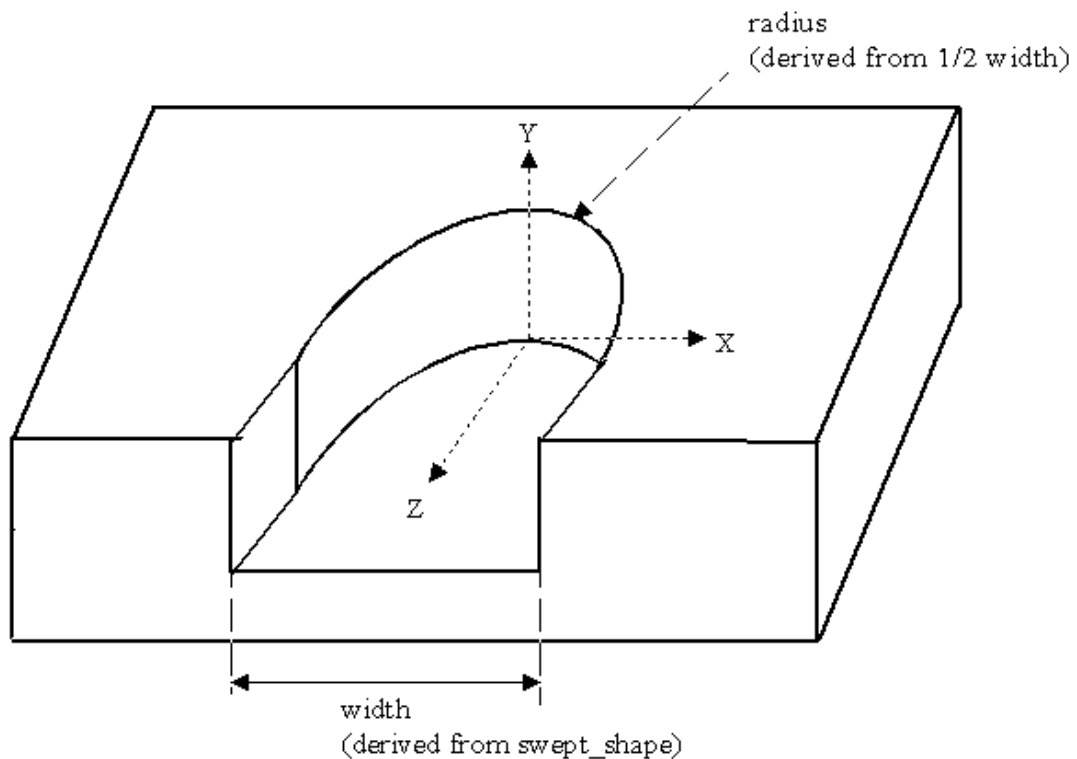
Radial\_dimension\_tolerance
